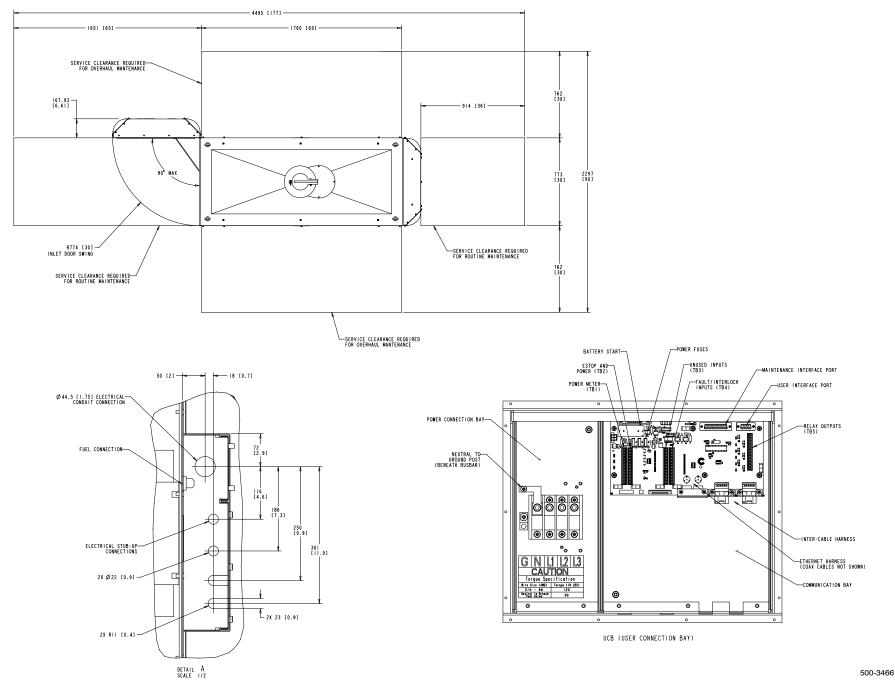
MODEL GTAA OUTLINE DRAWING-SHEET 2
